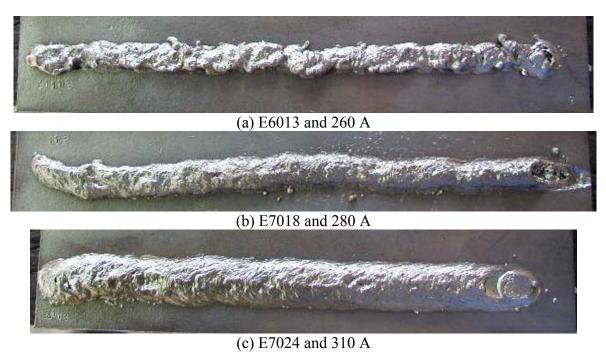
Pictures of the bead-on-plate wet welds deposited with the three electrode types with electrode negative on API 5L Gr. B steel plates at 50 m.
